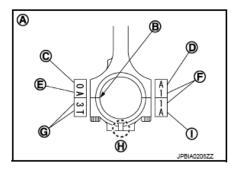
Identifying Connecting Rod Big End Diameter Grade On Connecting Rod Courtesy of NISSAN MOTOR CO., U.S.A.
